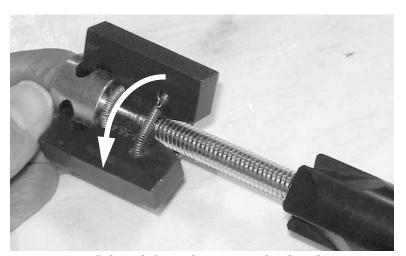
While pushing in on the drawbar, turn it to thread it into the machine. Screw it all the way in.
